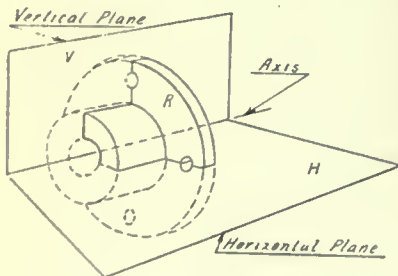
FLANGE COUPLING SHOWING HALF SECTION.
